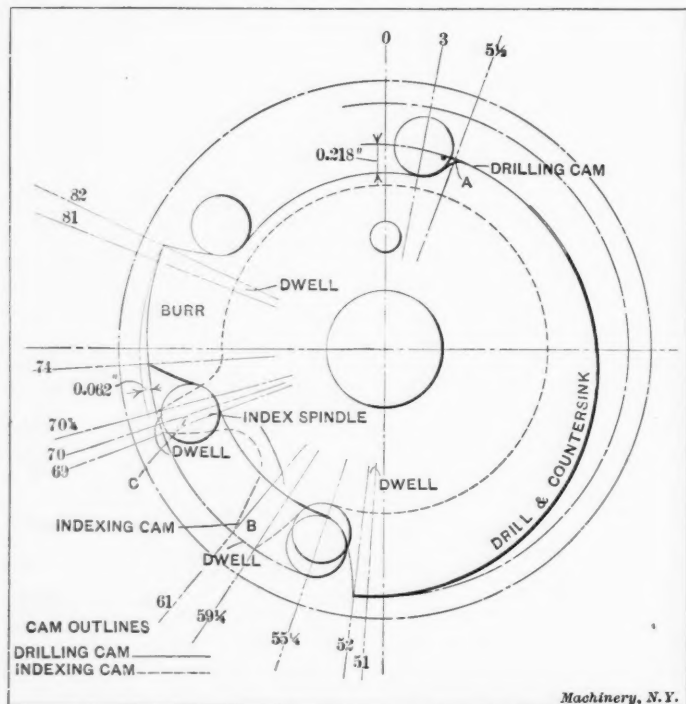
Indexing and Drilling Cams for the Piece shown at A in Fig. 20
